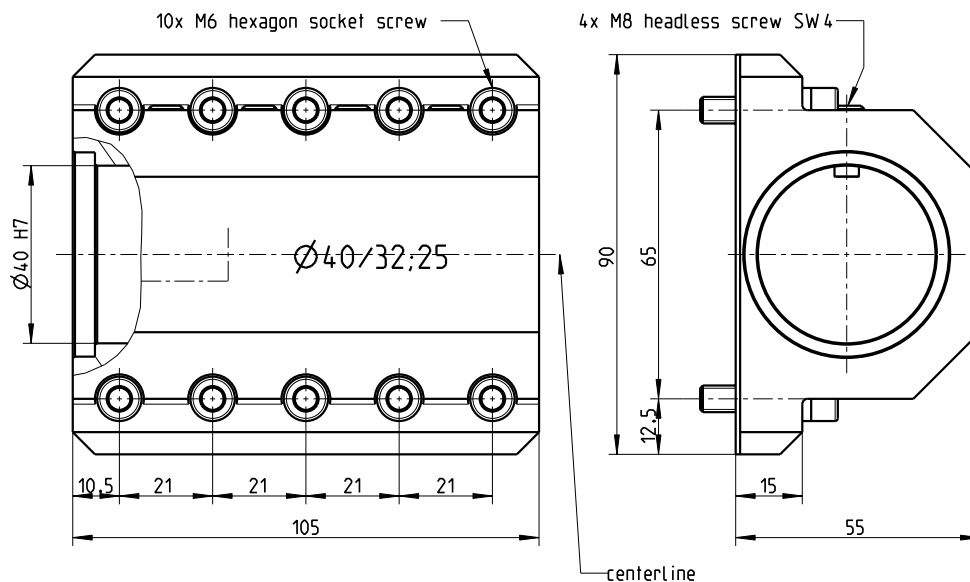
Tool holder for boring bars up to  $\varnothing 40$  mm for radially mounted dynamometer with reducing bushings  $\varnothing 40/32$  mm,  $\varnothing 40/25$  mm, Type 9129AF40
